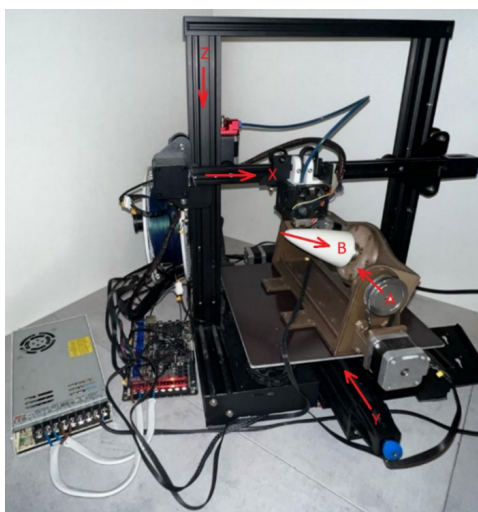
5-axis 3D printer prototype for the realization of non-layered cylindrical printing.
